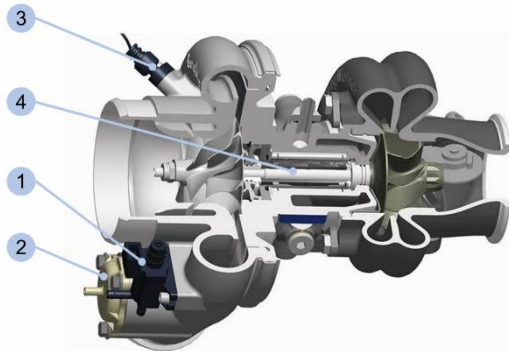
Construction of twin scroll BorgWarner EFR series turbocharger, equipped with a boost pressure control solenoid valve (BCSV) (1), integrated compressor bypass valve (CRV) (2), rotor speed sensor (3), and ceramic ball bearings (4) [18]
